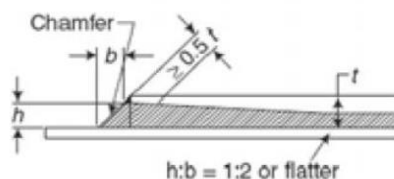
Full size Fillet Weld applied to the edge of a Plate or a Section
